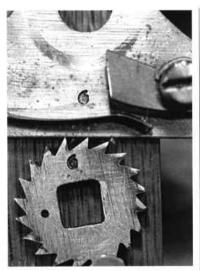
Blank no. 6 stamped on spring bearing and ratchet for Nicole 29138.
